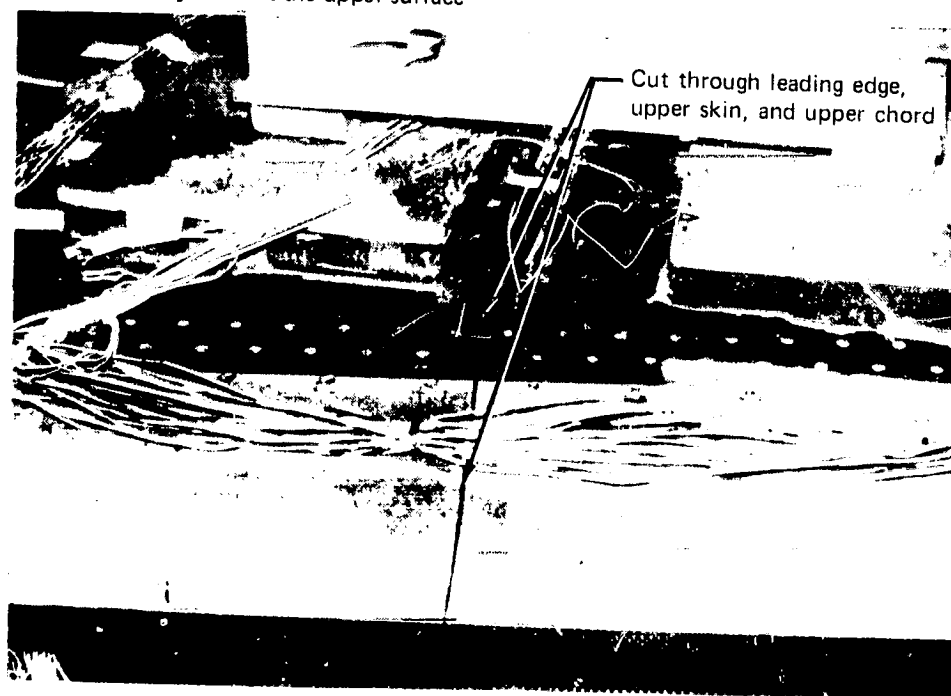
Stub Box Damage Tolerance Test—Cut Through Leading Edge, Upper Skin, and Upper Chord
